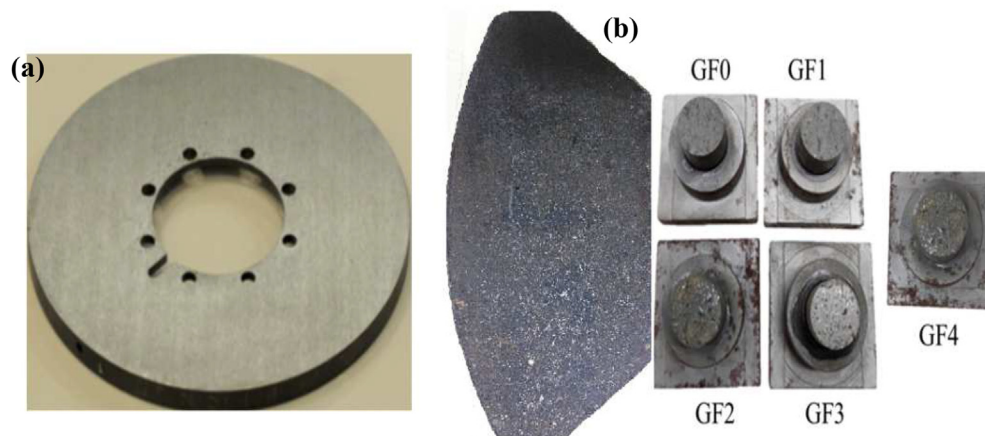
Specimens used during the tests: (a) gray cast iron disc, (b) samples (pins) of the brake friction materials.
